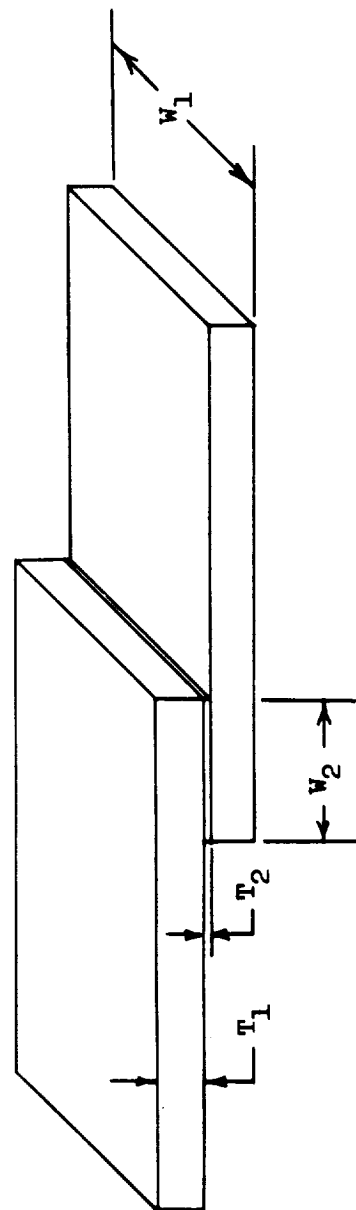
ZINC BRAZED LAP SHEAR JOINT - TEST SPECIMEN
